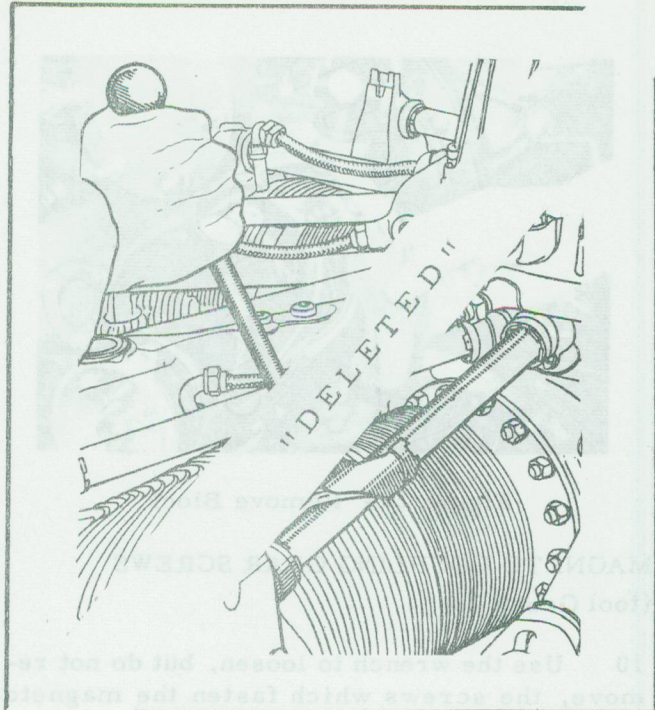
Unfasten Pushrod Cover Nuts - Cylinder End
